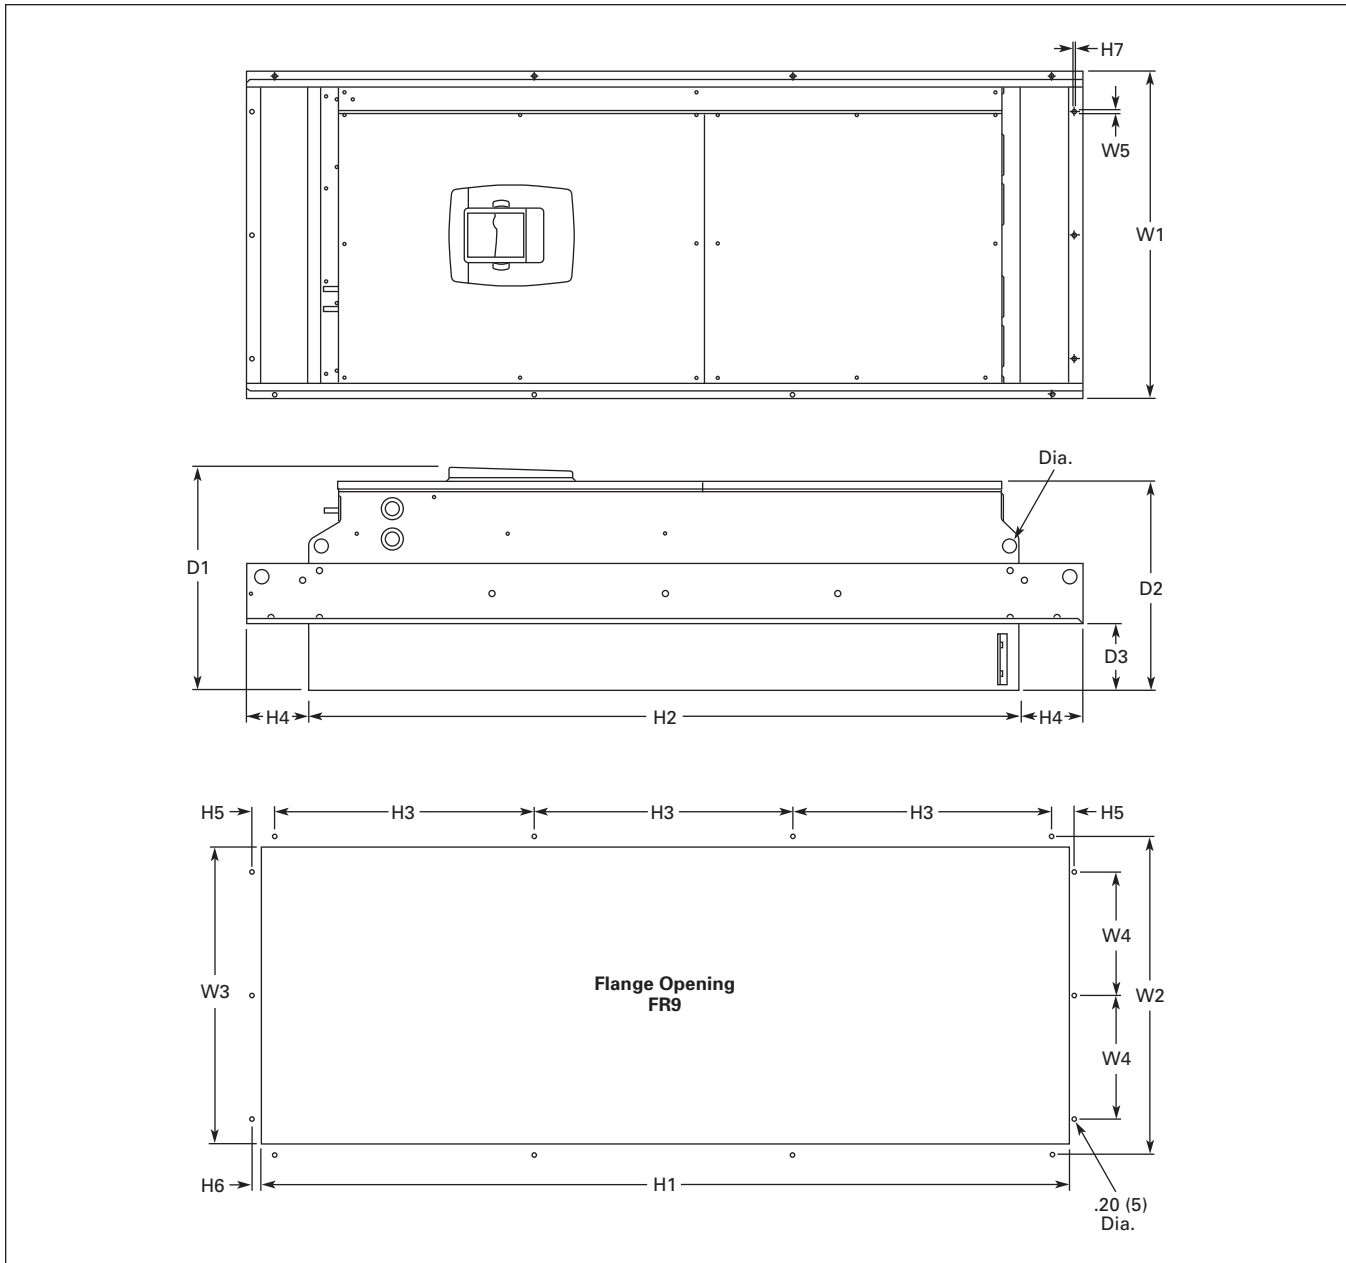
HVX9000 Dimensions, NEMA Type 1 and NEMA Type 12 FR9 with Flange Kit
